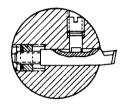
A lathe turning tool in a drill rod is adjusted by a differential screw. A special double-pin wrench turns the intermediate nut, advancing the nut and retracting the threaded tool simultaneously. The tool is then clamped by a setscrew.
